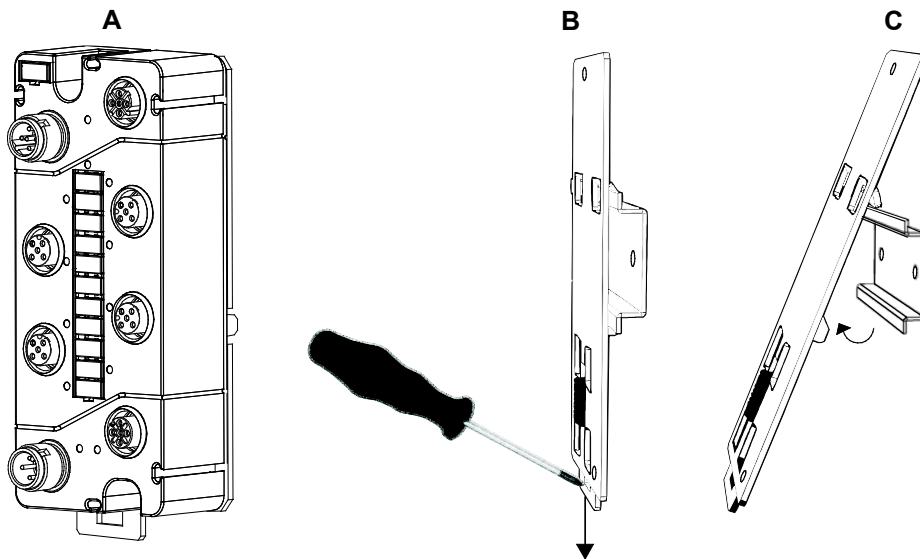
Removing the module (with the carrier rail adapter) from the carrier rail
